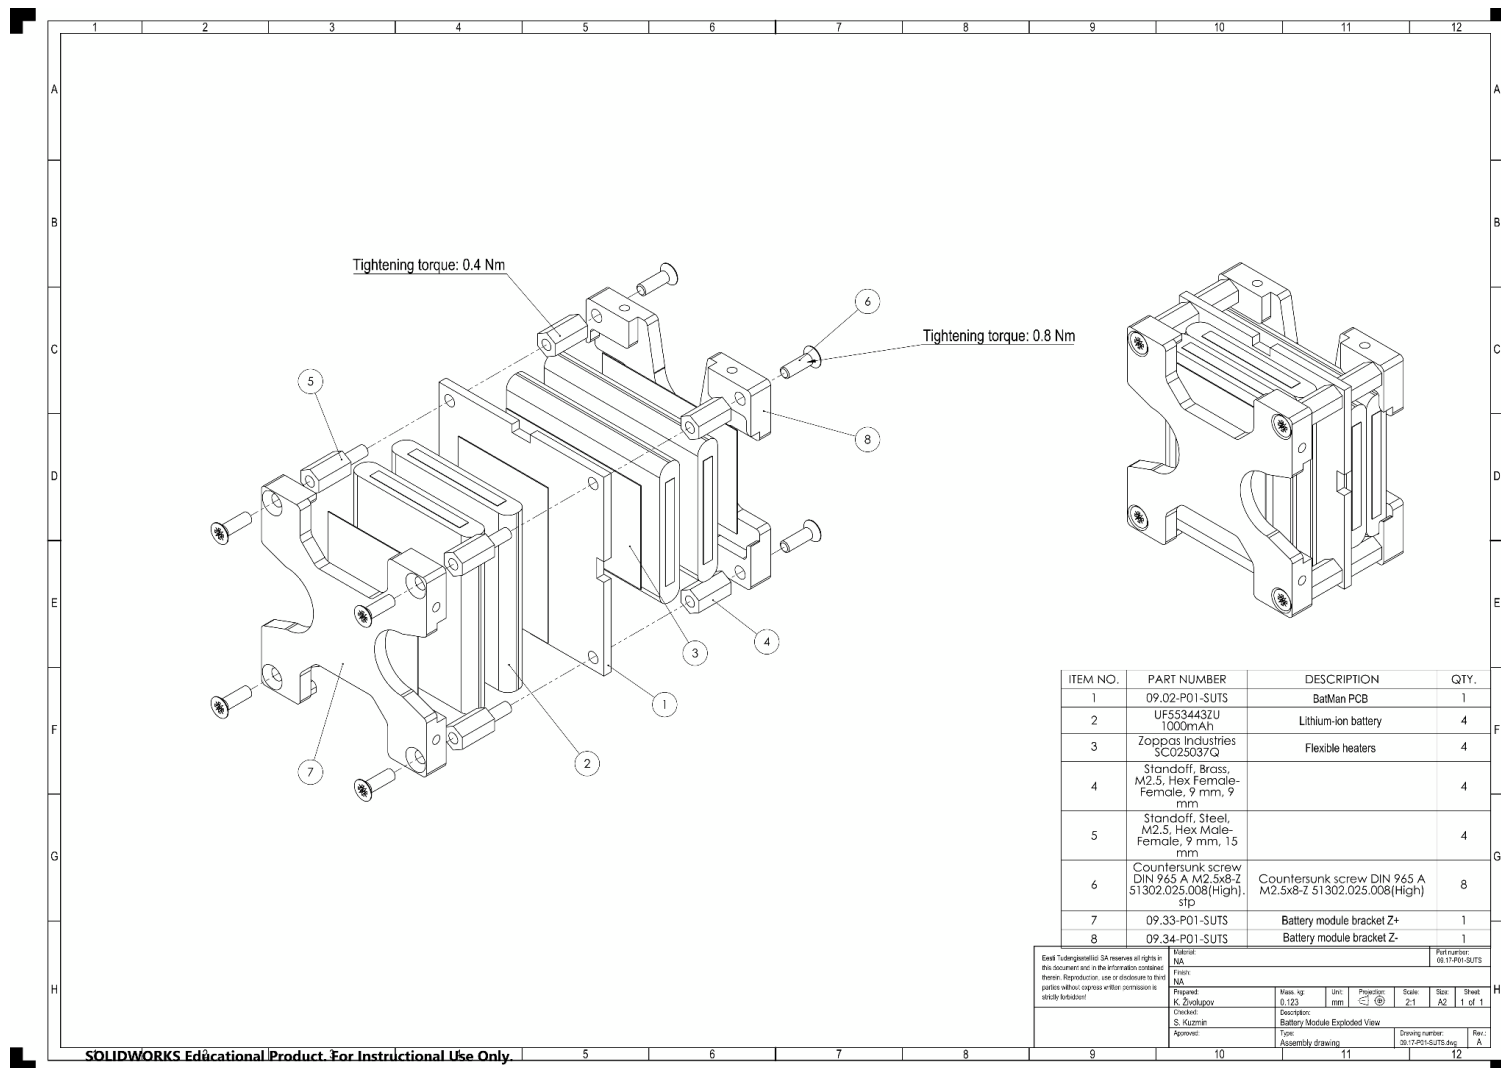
Technical drawing of battery module assembly 09.17-P01-SUTS
